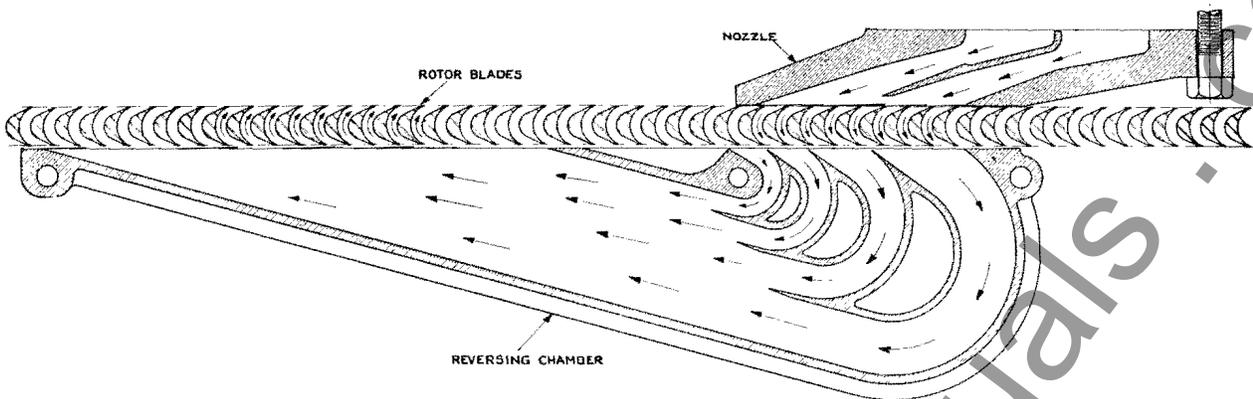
DEVELOPED SECTION THROUGH NOZZLE BLOCK AND REVERSING CHAMBER, SHOWING PATH OF STEAM
